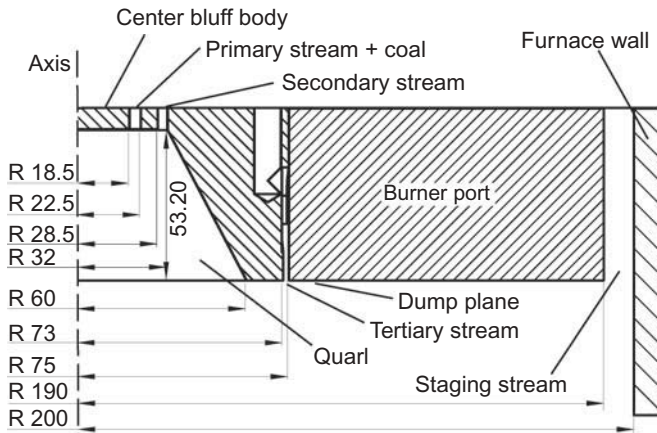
Half section of the swirl burner mounted at the burner port, dimensions given in mm.
